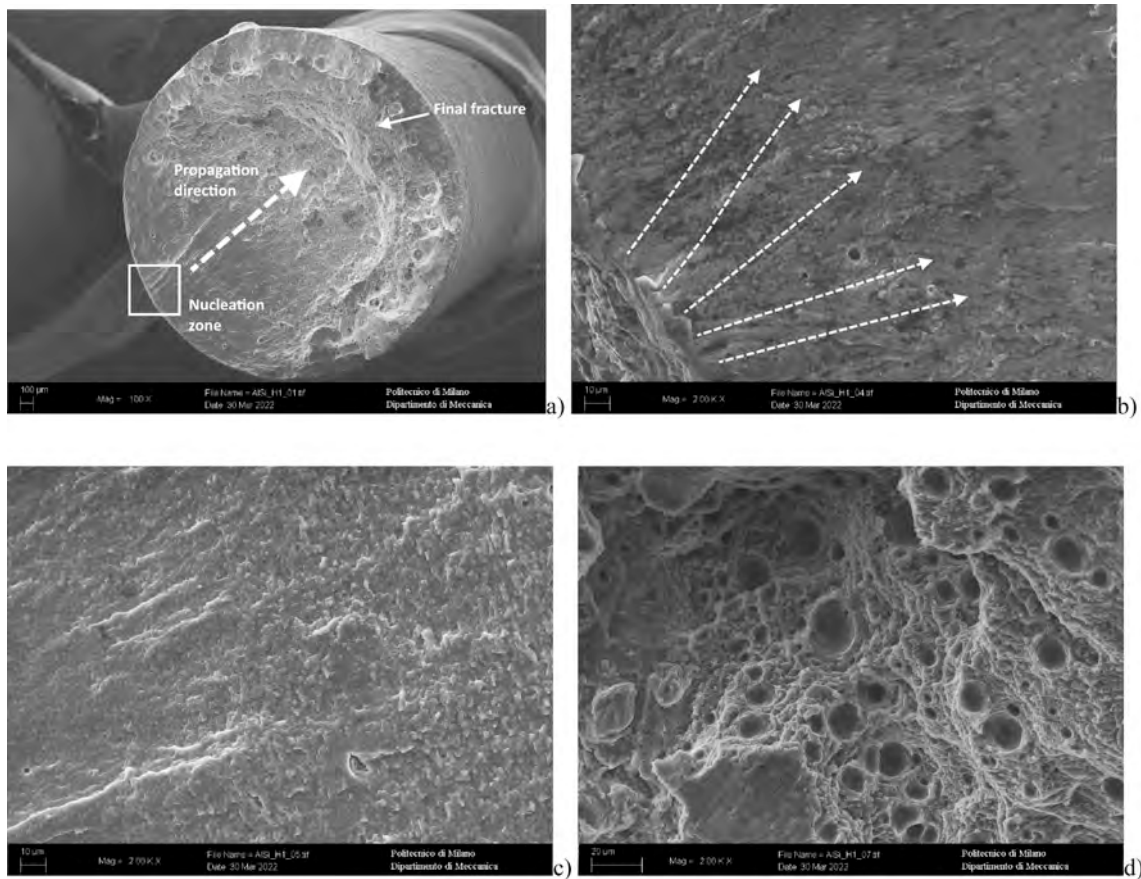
Fracture surface analysis of specimen HCF1 - (a) fracture surface, (b) nucleation zone, (c) propagation zone, (d) final fracture. Macro- and micro-porosity is clearly visible.
